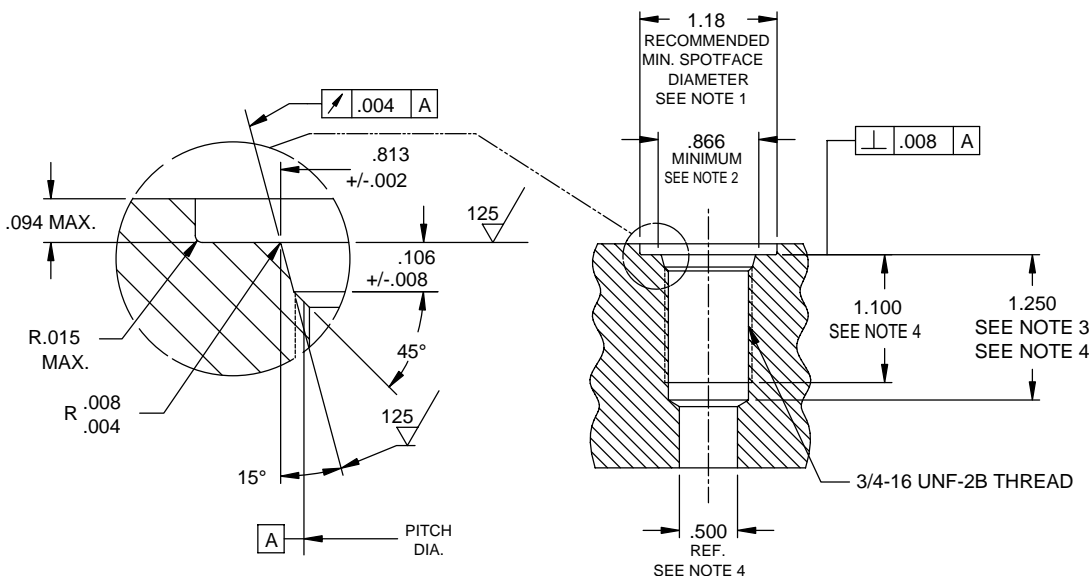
Mounting LDT in a Hydraulic Cylinder
